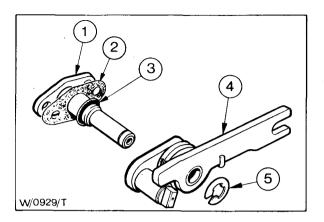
Rocking Lever and Pivot Shaft Assembly (Turbocharged Pumps)
